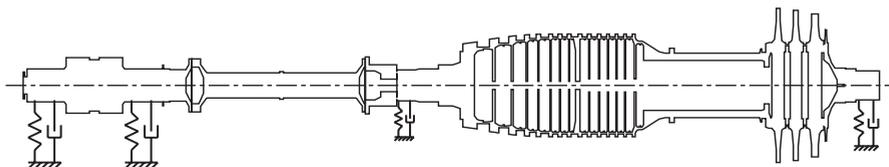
Gas turbine rotor with intermediate shaft, pinion and bearings.
